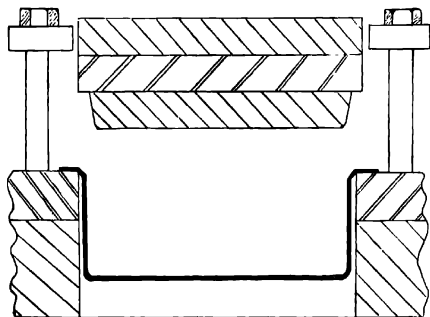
Final trimming tool ("blanking type") for producing rectangular box.
